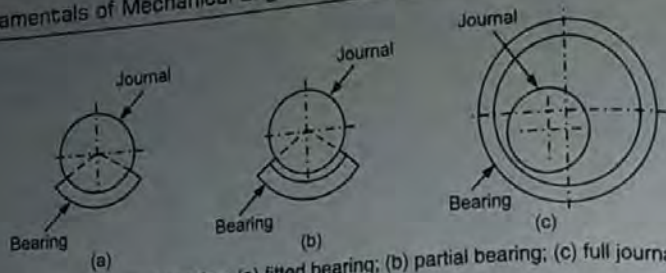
Types of journal bearing: (a) fitted bearing; (b) partial bearing; (c) full journal bearing
